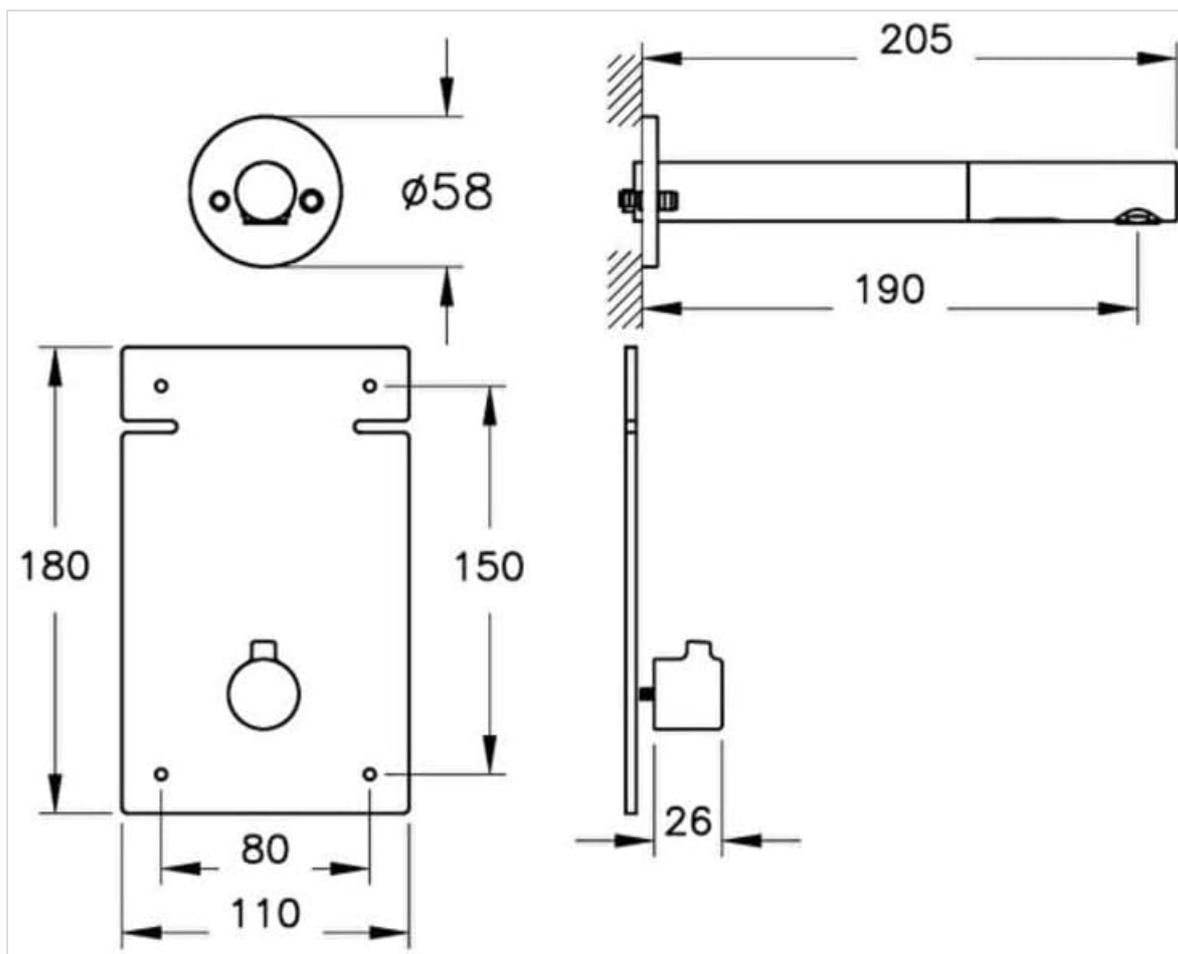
Technical drawing illustrating the dimensions for the Vitra Origin A4711136WTC built-in touchless basin faucet. This diagram shows the main body dimensions, mounting plate, and spout projection. All measurements are in millimeters.
